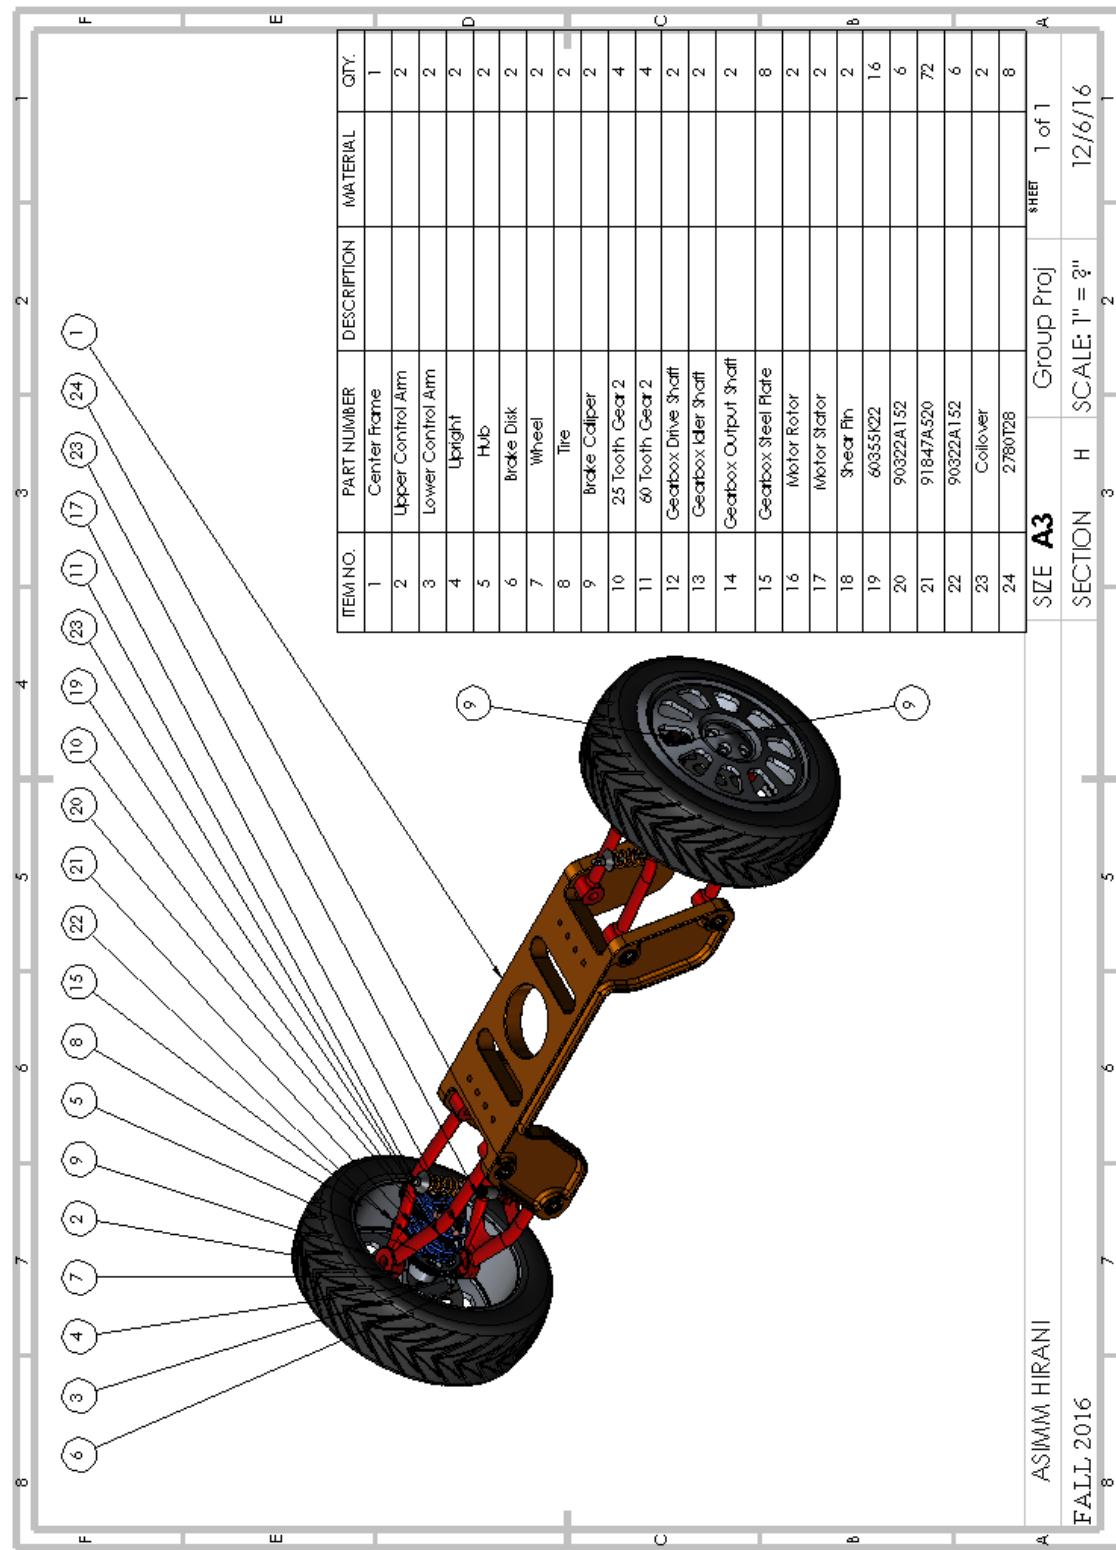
Hirani, Asimm: Suspension Assembly
